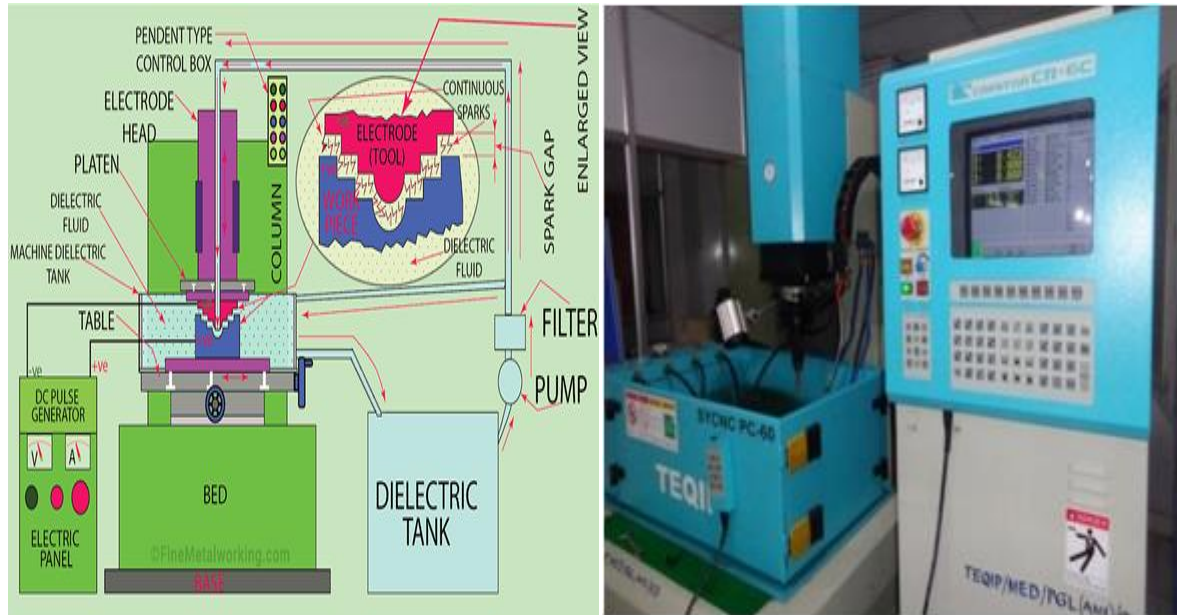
Die sinker EDM working diagram and CNC EDM CREATOR CR-6C die sink EDM Machine.
